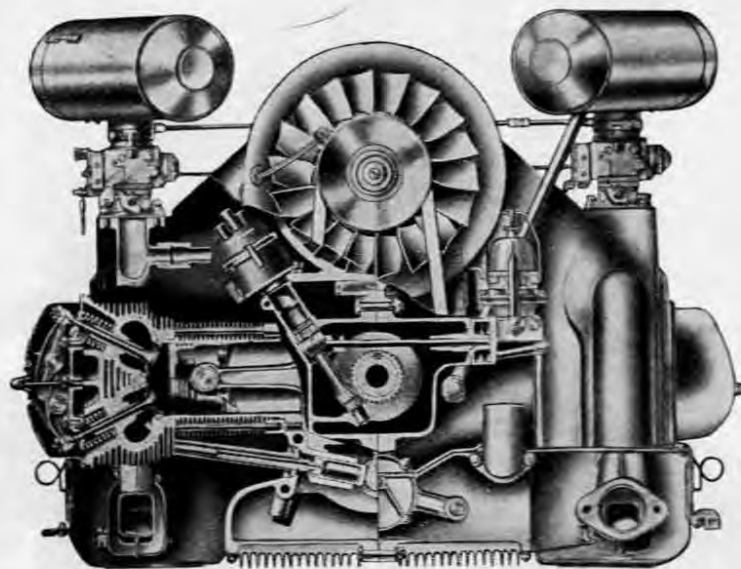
Cross section of the T 600 engine with fan on horizontal shaft and two carburetors.
